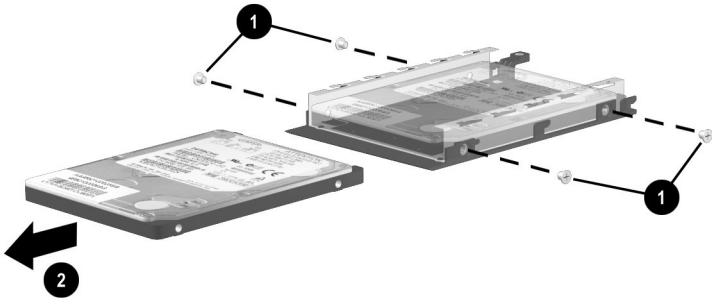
Removing the Hard Drive from the Hard Drive Bezel
